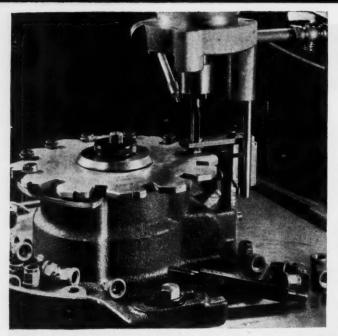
Automatic dial feeding fixture designed to hold steel aircraft nuts for tapping ½ inch deep at a rate of 400 per hour.
